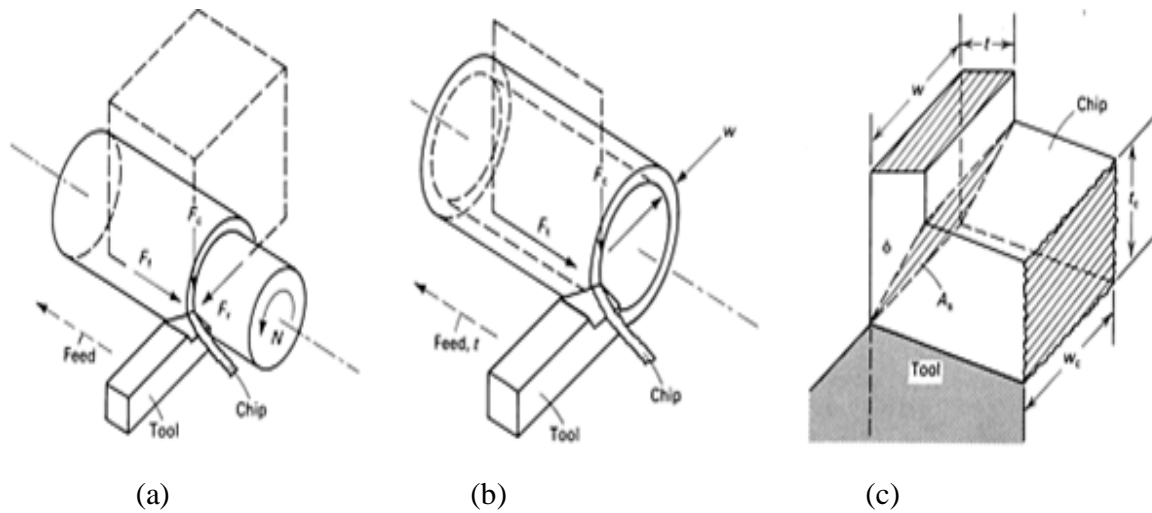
Comparison of oblique and orthogonal geometry machining. (a) Three-force oblique machining. F_c is the primary cutting force, F_t is the feed force, and F_r is the radial or thrust force. (b) Two-force orthogonal machining. F_c is the measured cutting force, and F_t is the feed (tangential) force. A tube-cutting application is shown; the cutting edge of the tool is perpendicular to the direction of motion. (c) For orthogonal cutting, the shear area, A_s occurs for a shear angle Φ , width of cut w , and feed t .
